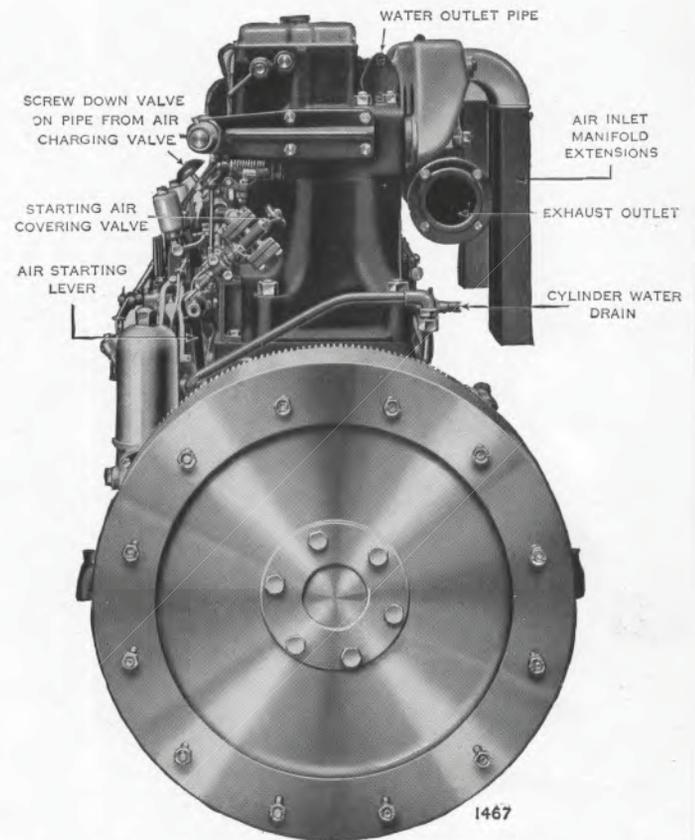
FLYWHEEL-END VIEW OF RAIL-TRACTION ENGINE
